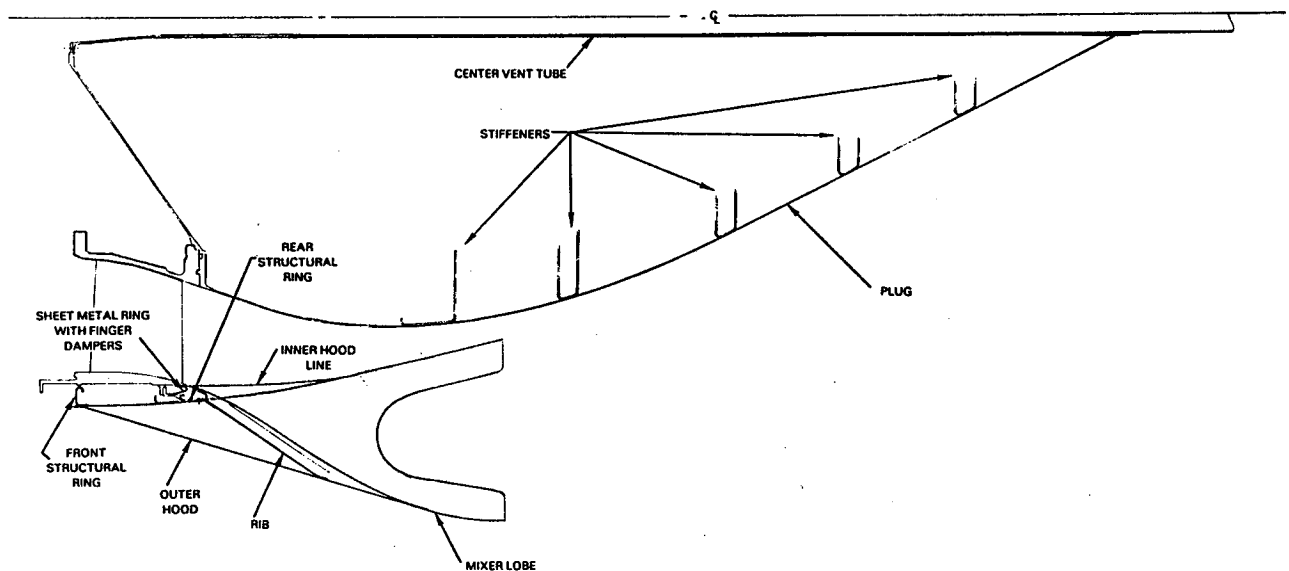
Integrated Core/Low Spool Exhaust Mixer and Plug Mechanical Design
